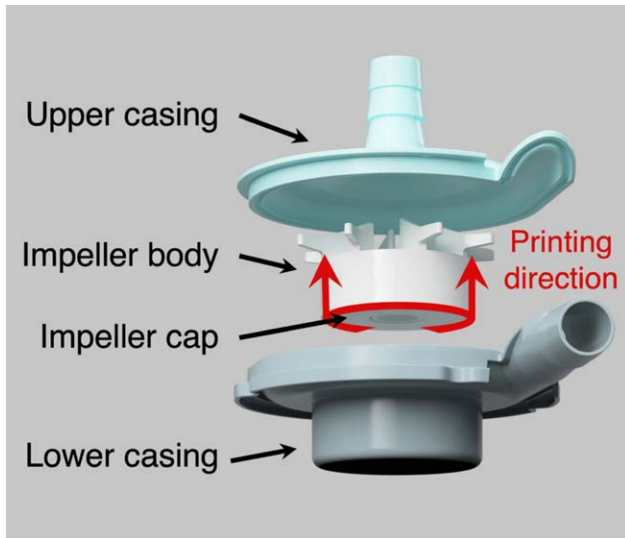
Schematic of the assembly of the CentriMag pump head. In this study, the impeller body was additively manufactured along its rotation axis (“Printing direction”).
